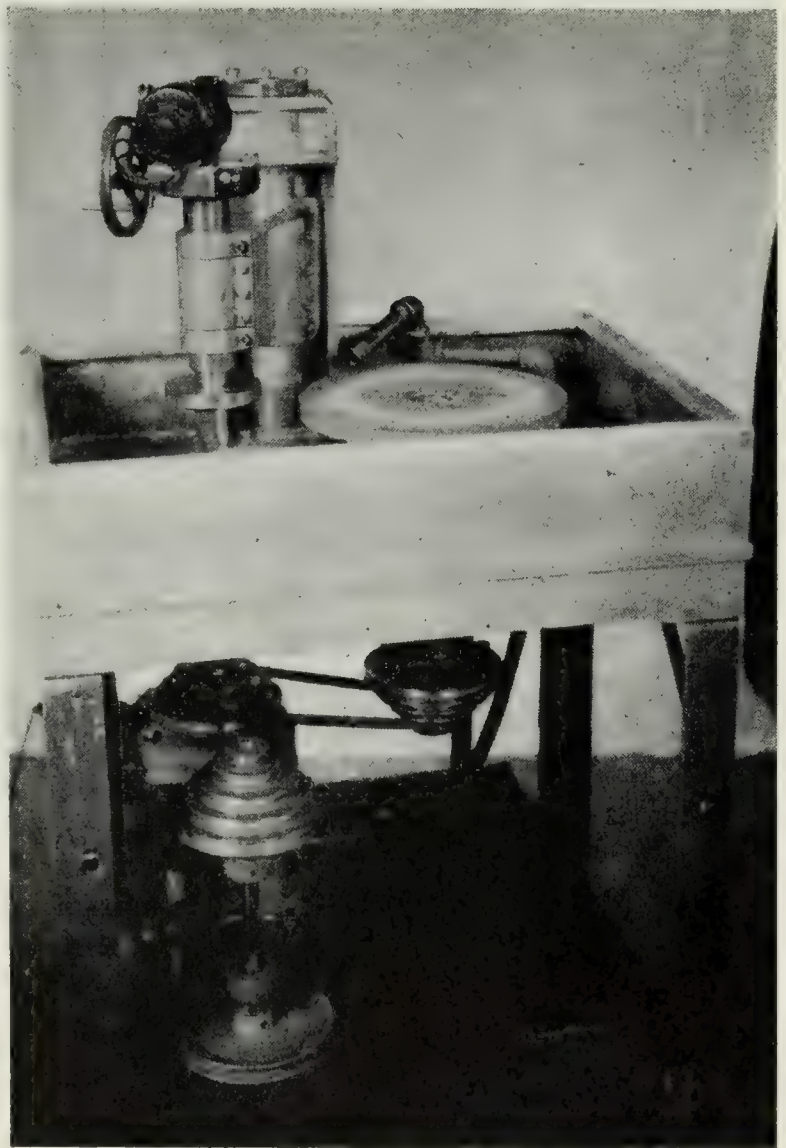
Sperisen Universal Lapping and Grinding Machine.
